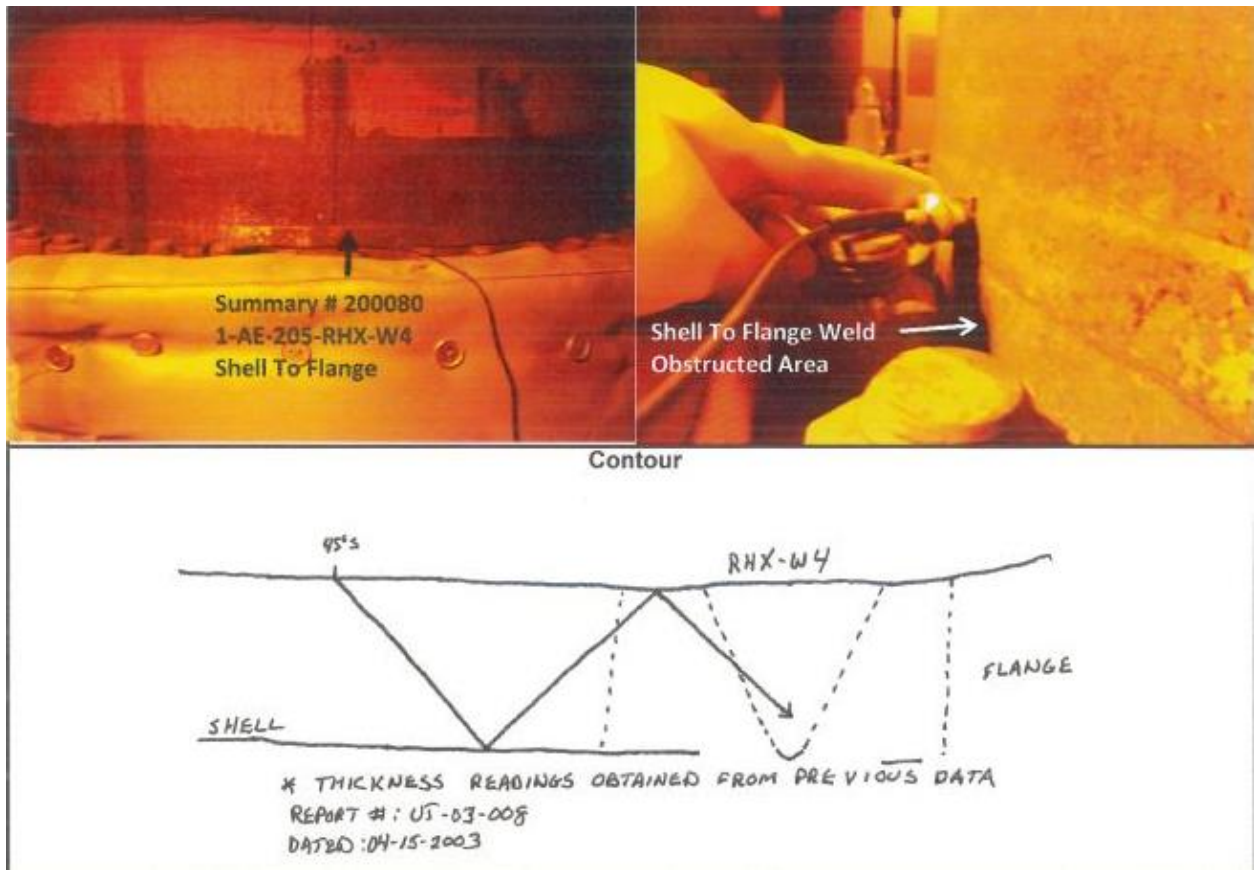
Weld 1-AE-205-RHX-W4 (Weld Profile) Weld Thickness and Contour
